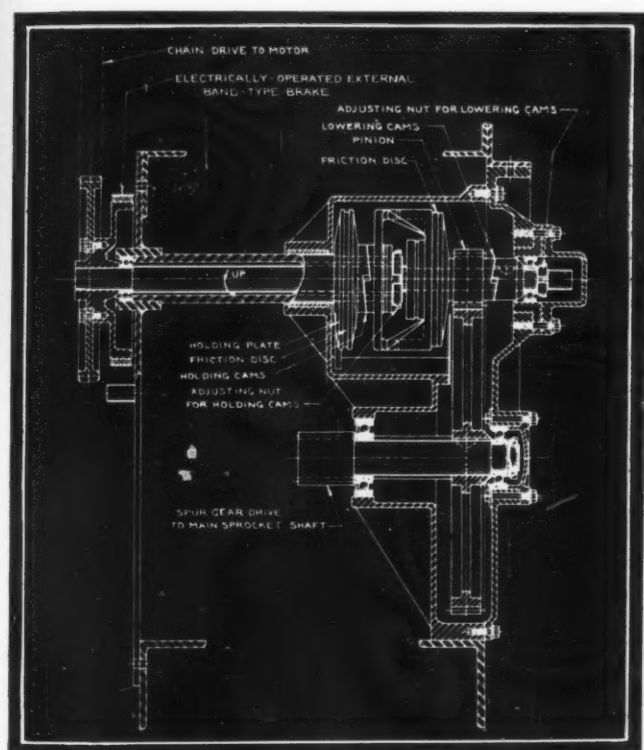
Section through hoisting unit gearcase showing cam-operated load brake and electric brake
